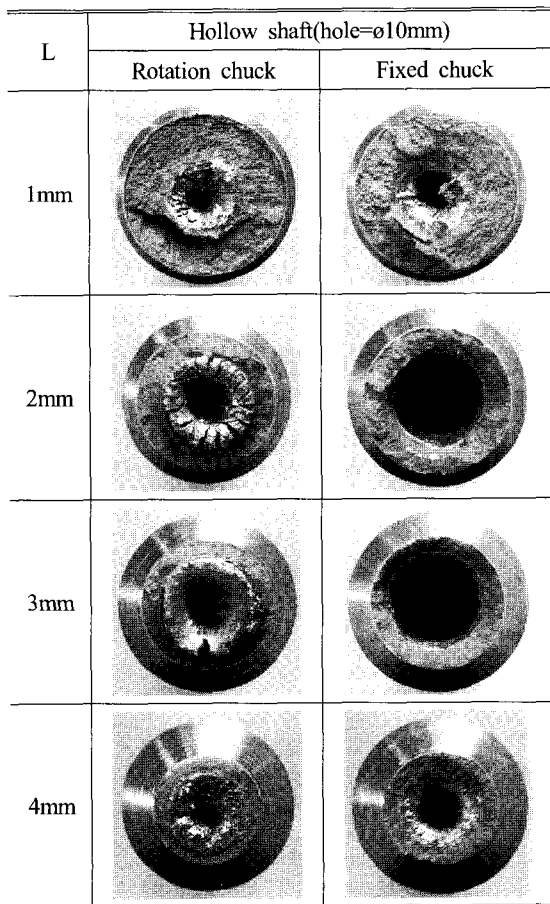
Tensile fracture surfaces of friction welds (Hollow shaft)
